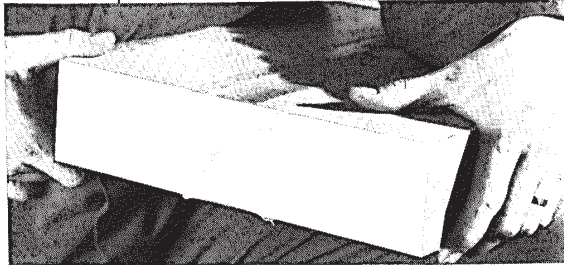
75mm thick 6082-T6 Al alloy friction stir welded with two passes
